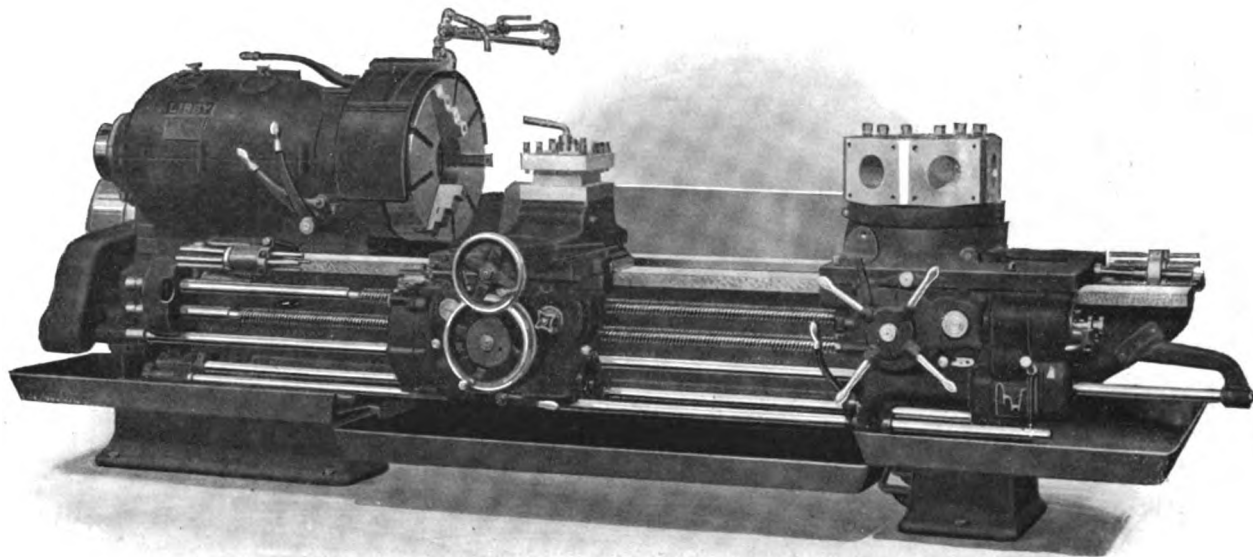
24-26-inch Type "C" Libby Turret Lathe
